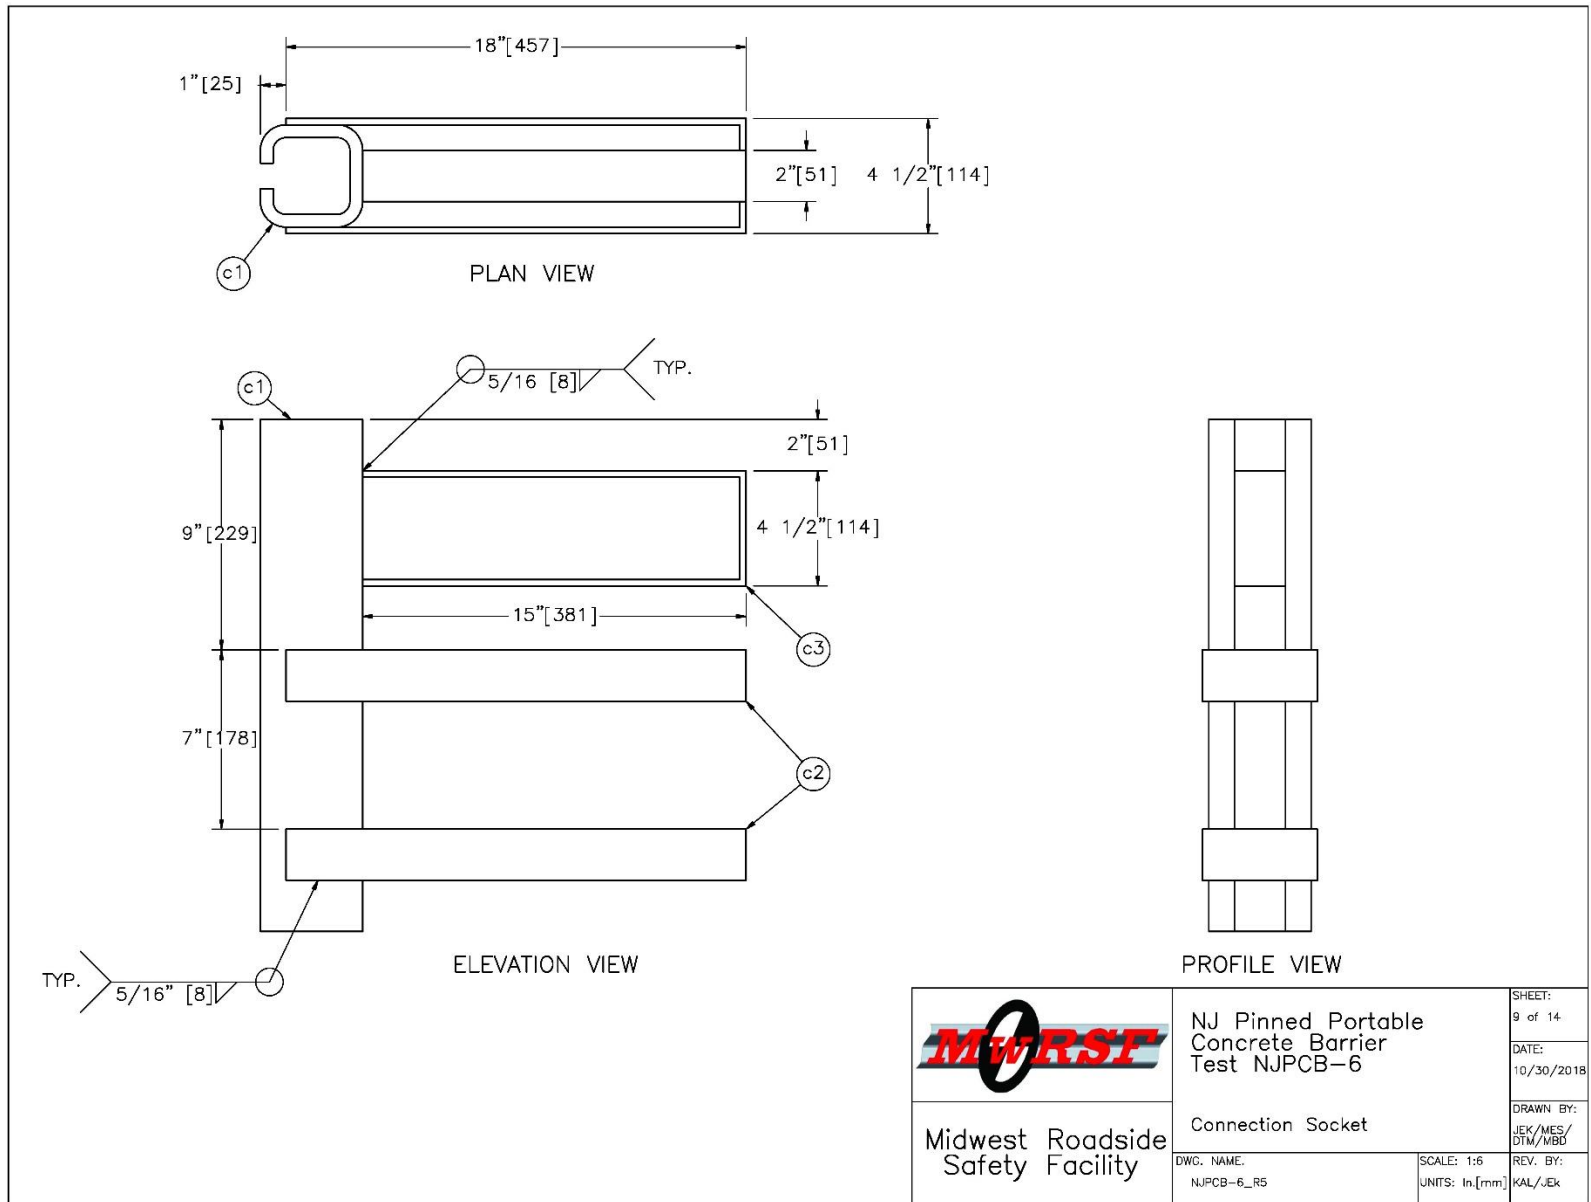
PCB Connection Socket Details, Test No. NJPCB-6
